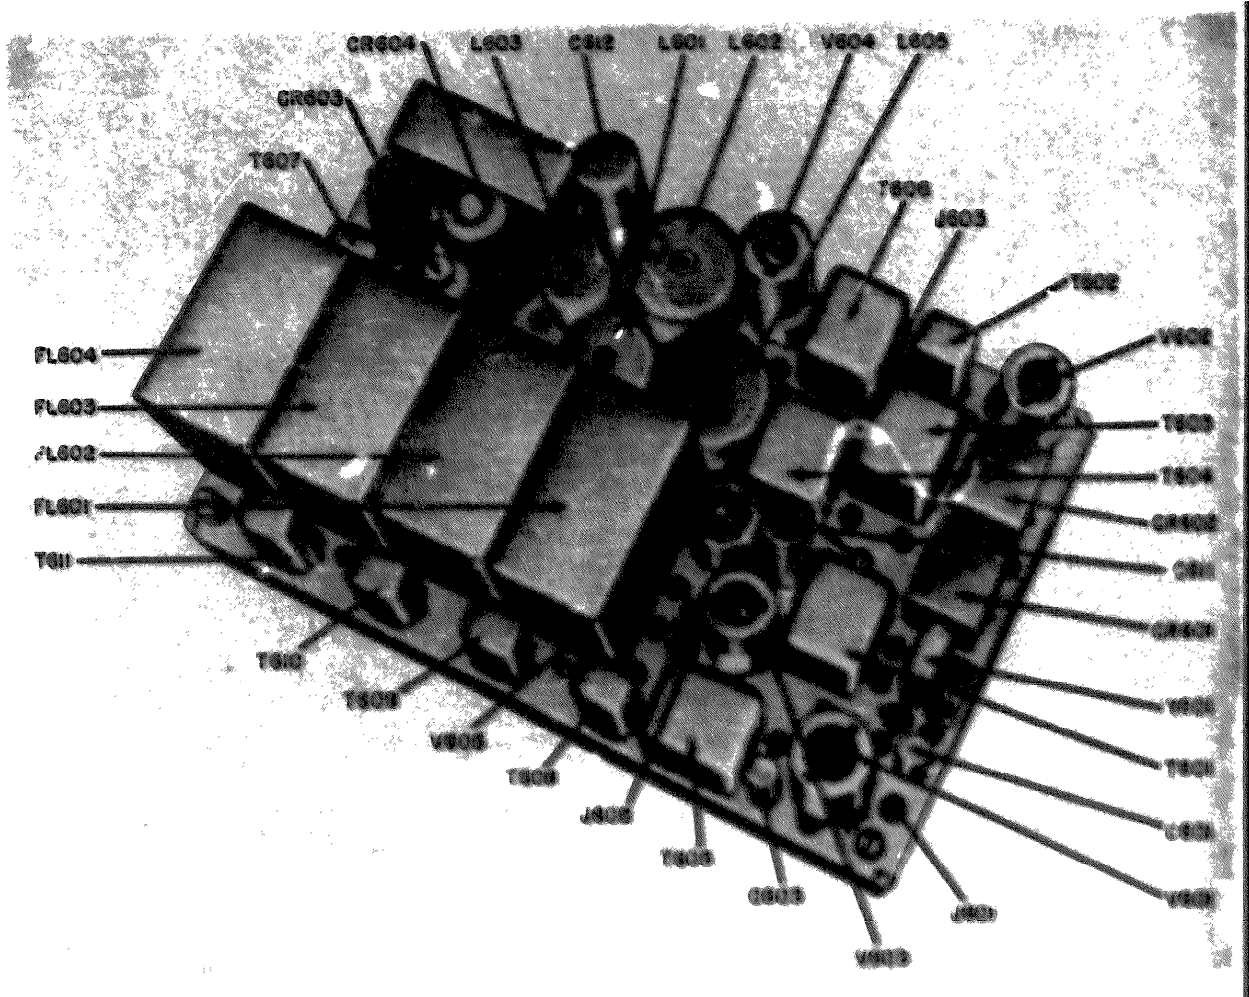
Carrier supply plug-in assembly, exploded view, correct element location diagram.
